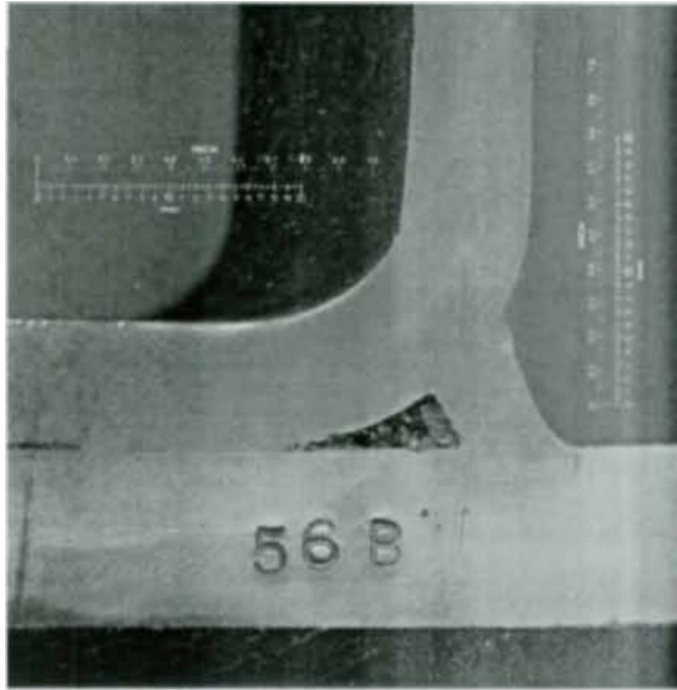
A cross-section of a flare bevel weld showing incomplete penetration at the root. *Image from [50].
